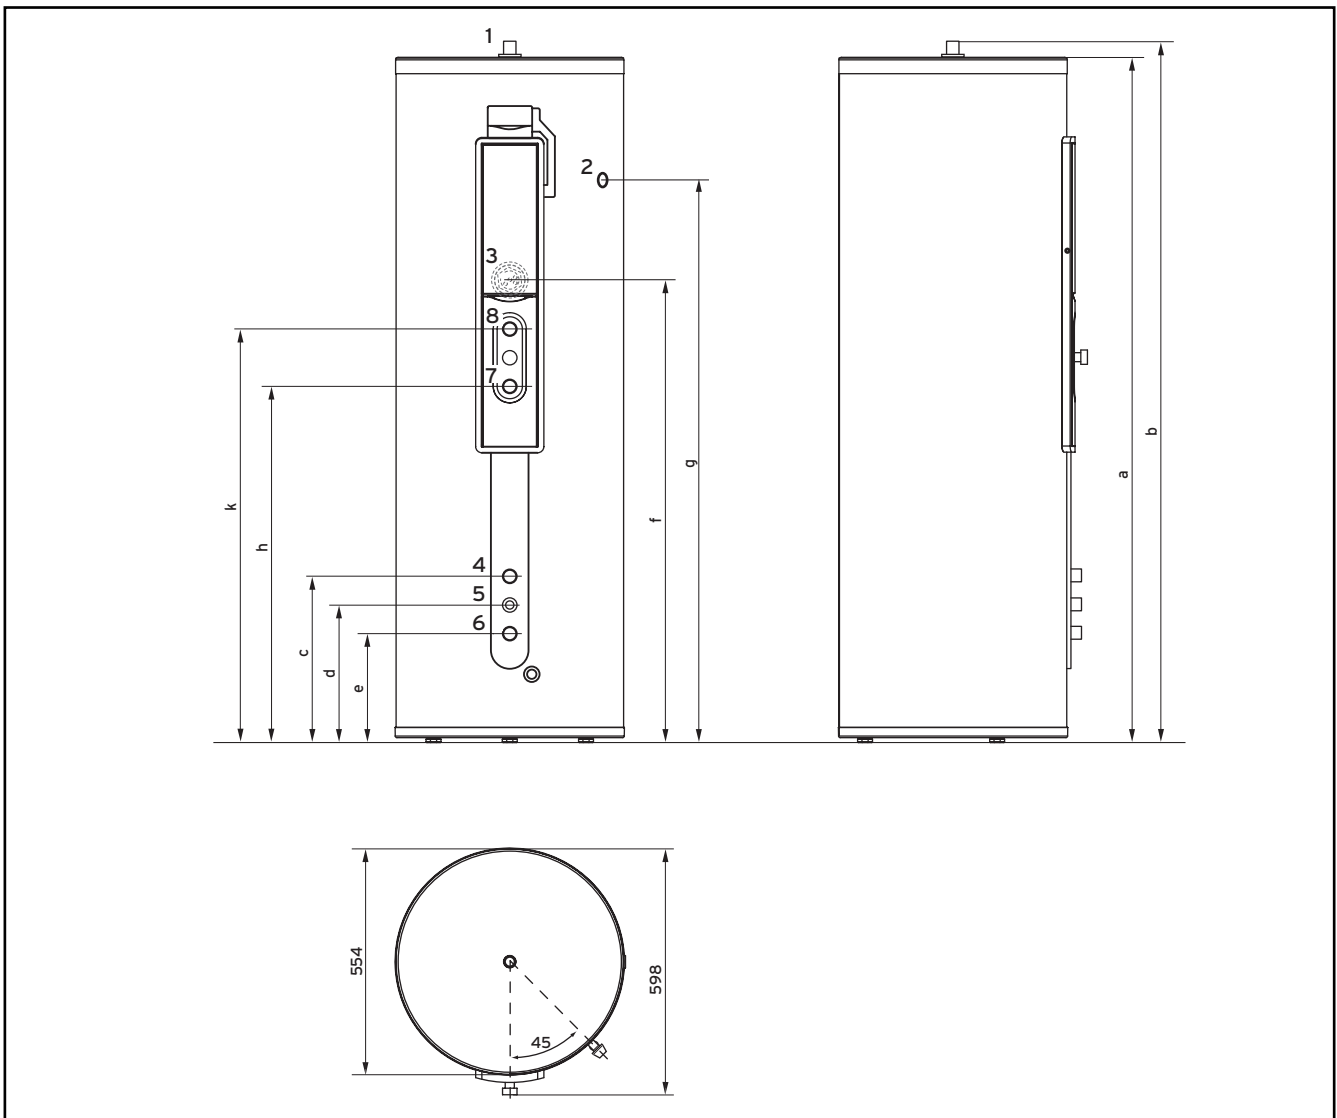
Dimensions of the auroSTOR solar cylinder
